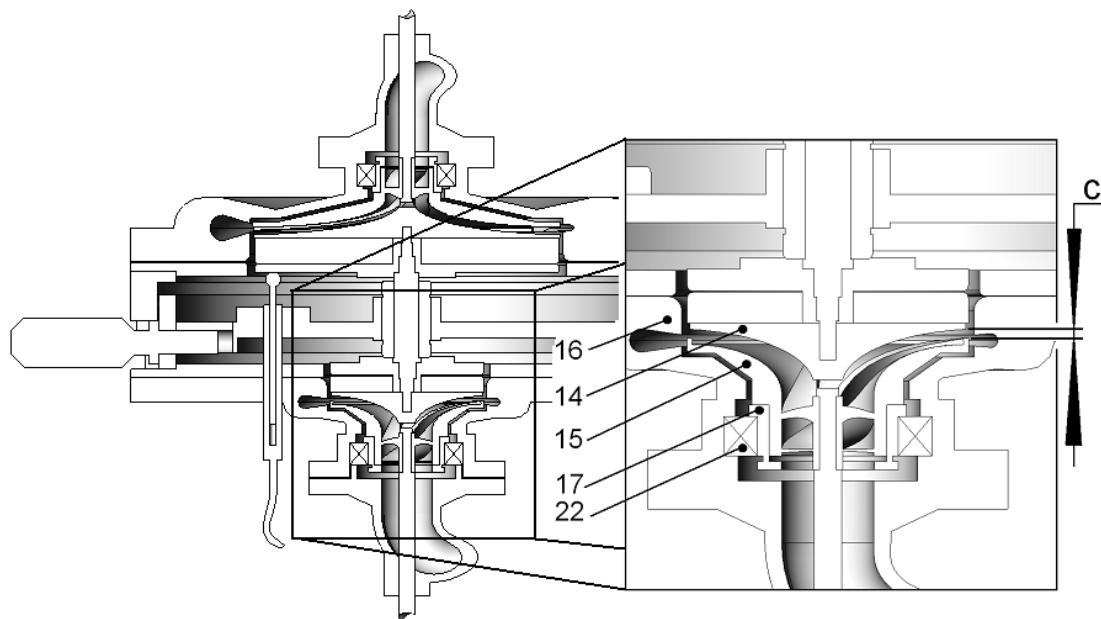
Zoomed image of the LVAD impeller and impeller location, non-rotating lower shroud and physical blade clearance (c).
